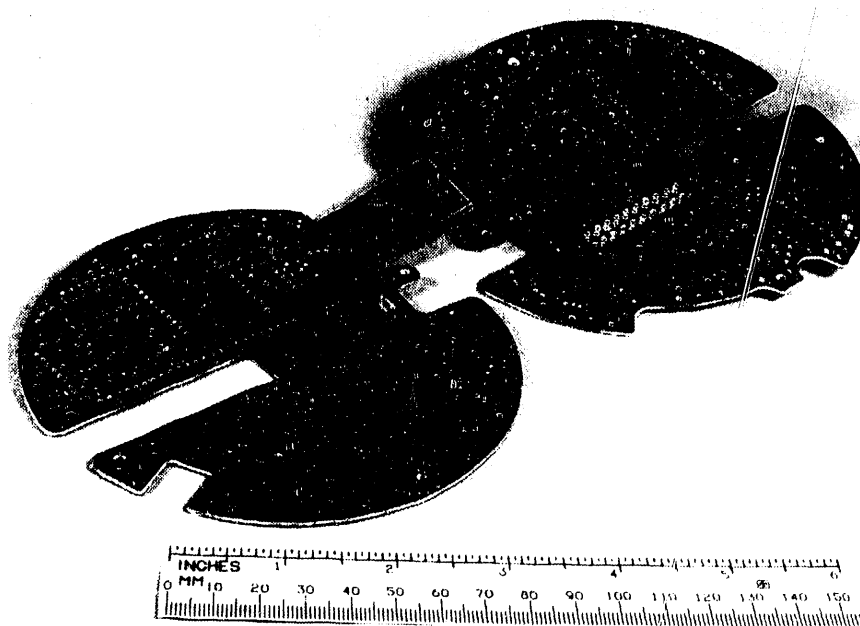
MC3811 Rigid/Flex Printed Wiring Board
